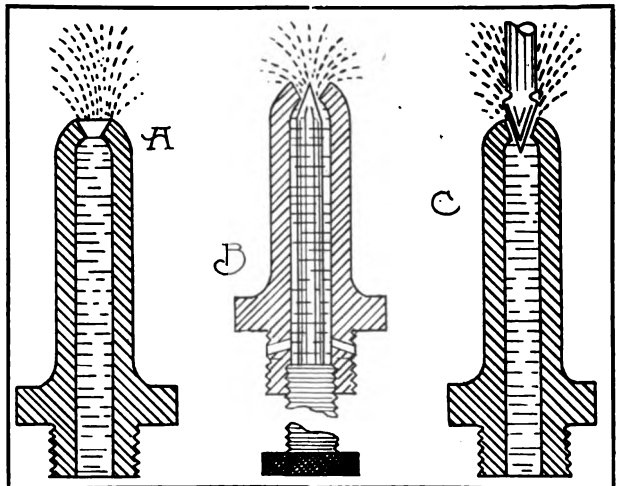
Types of Spray Nozzles Much Used in Carburetor Designs.
